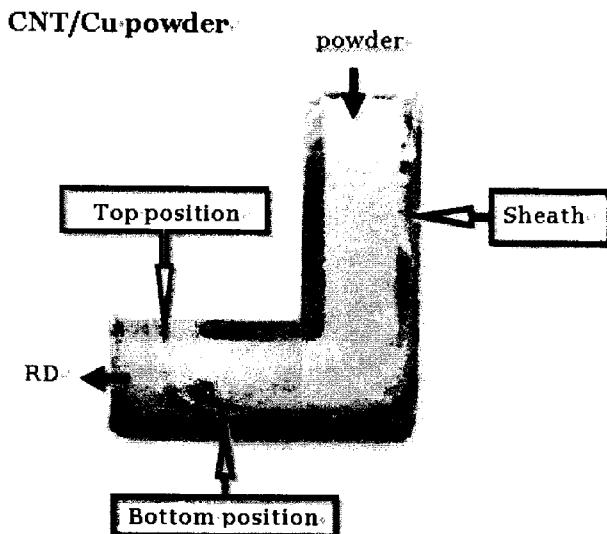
Workpiece material and marked positions in sheath powder ECAP.
